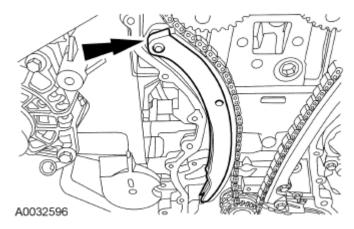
Locating Timing Chain Guide Courtesy of FORD MOTOR CO.
